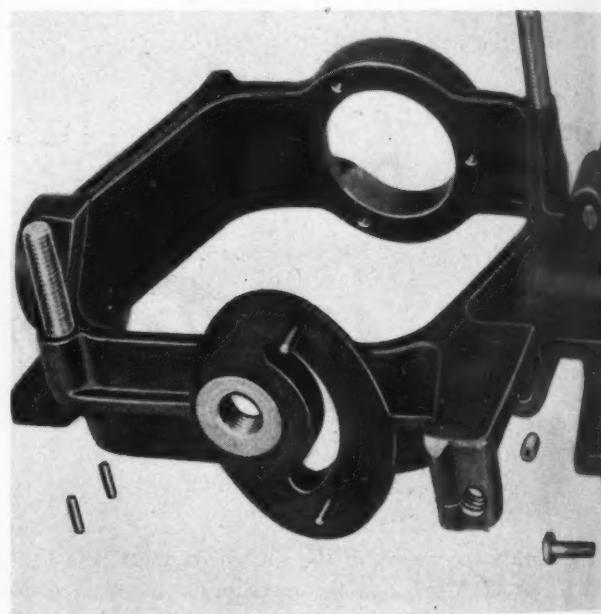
Diecast magnesium part for automatic pilot utilizes threaded inserts to improve properties and reduce machining costs
